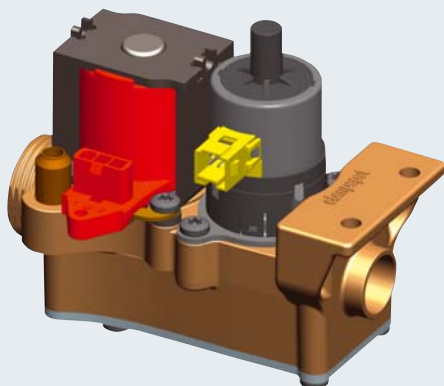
Modular Design: Safety module, stepper motor module, and housing (assembled)
